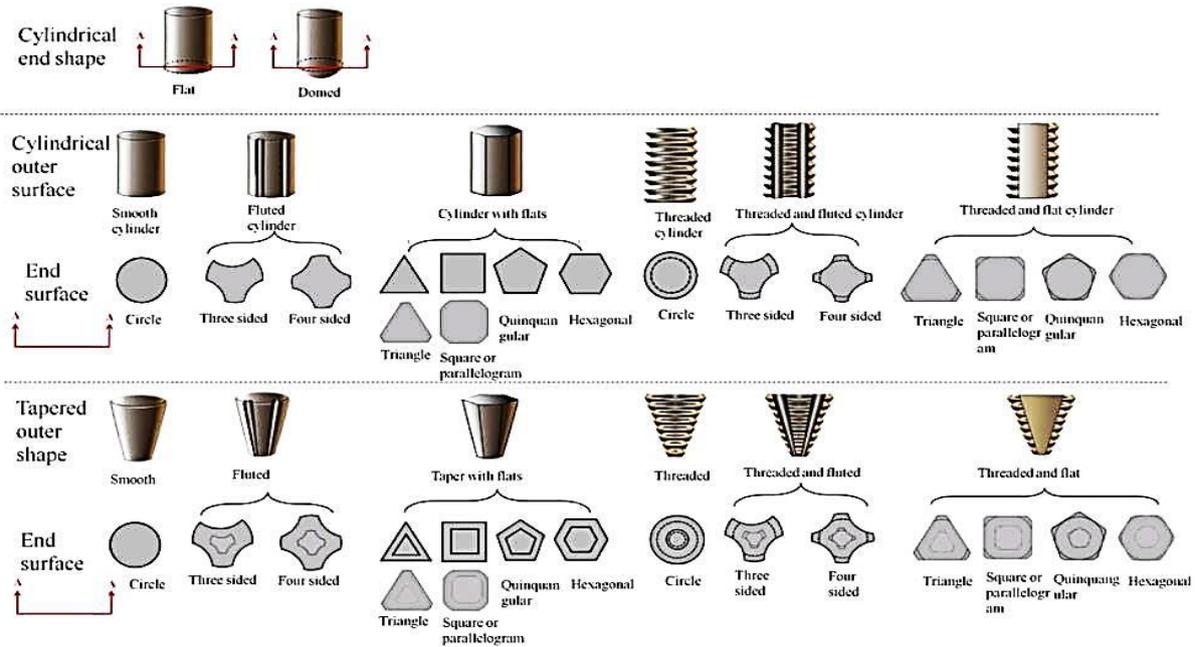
Various tool probe profiles in Friction Stir Welding process
